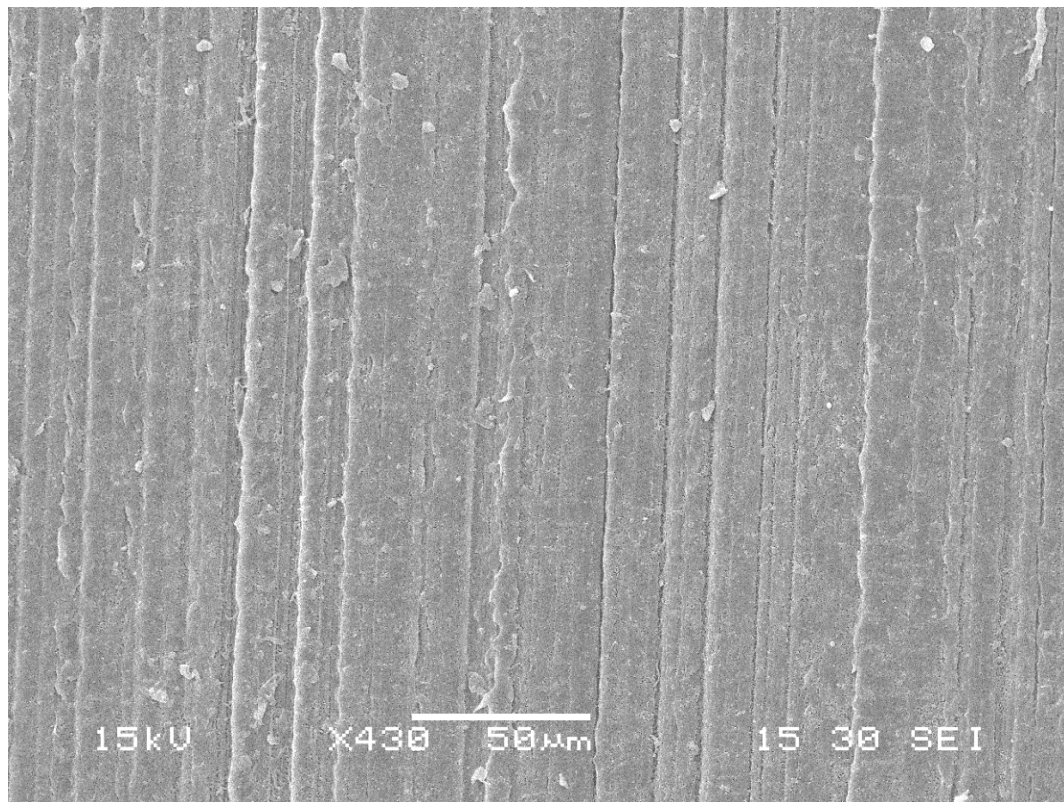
Unworn polymer gear tooth flank showing machining marks.
